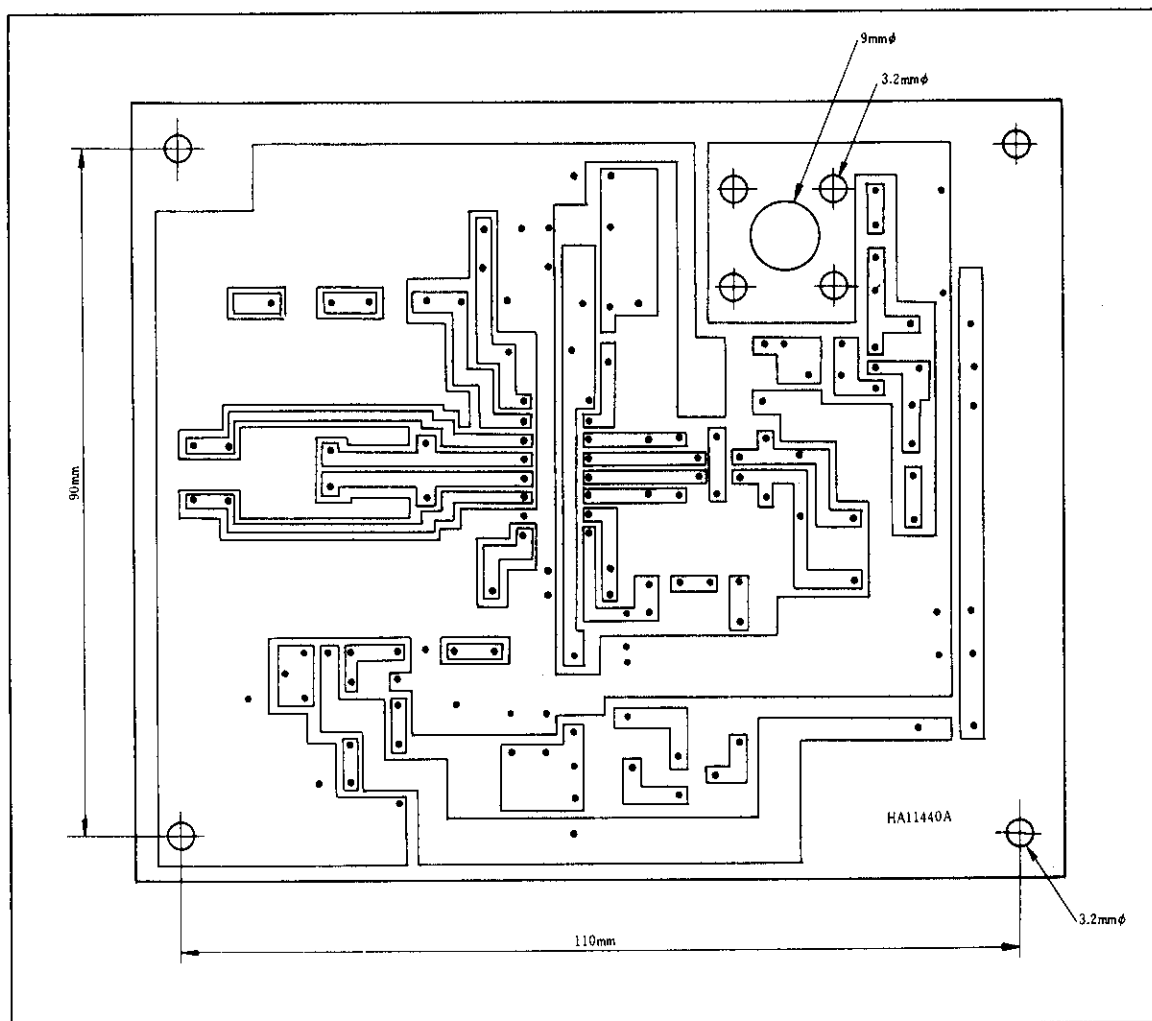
Printed Circuit Board Layout Pattern (Bottom View)
